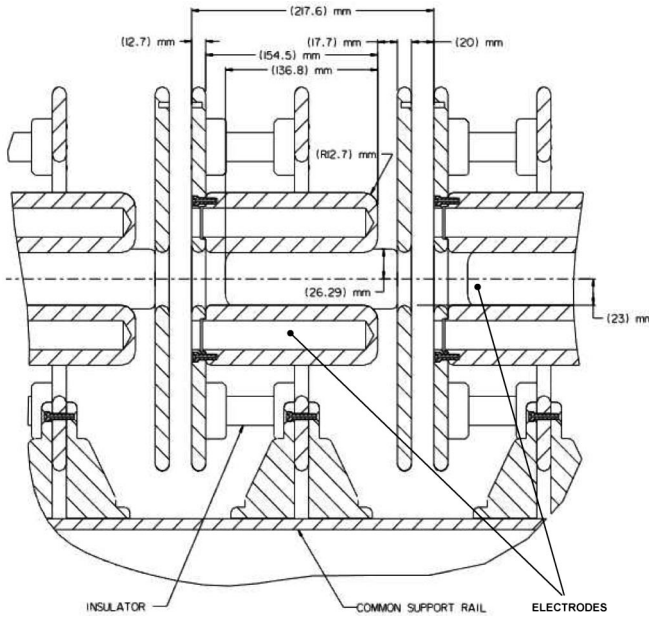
Mechanical drawing (side view) of a quadrupole installed on the beam line.
